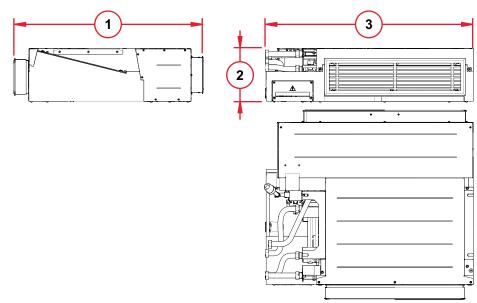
Unit dimensions of BLOCK duct (return air from the back)
